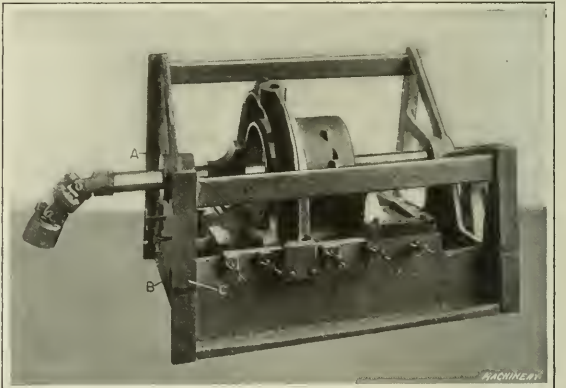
Triple Based Fixture used for drilling, boring and reaming All Holes in Carriage at Single Setting
